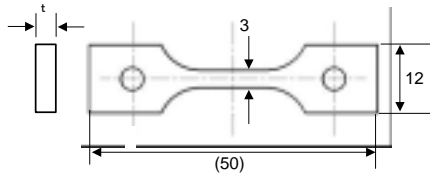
Specimen shape cutting from model blades and the position machined specimens out.
